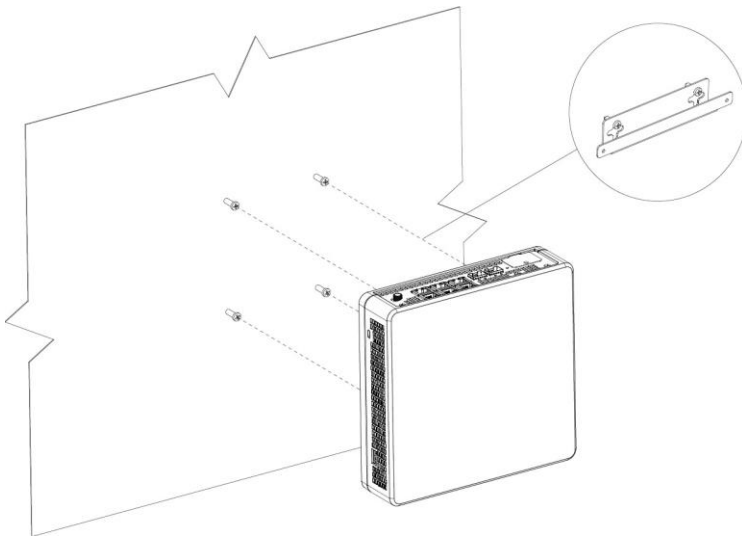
VEP1420 series wall mount, installation anchor, and screw dimensions
